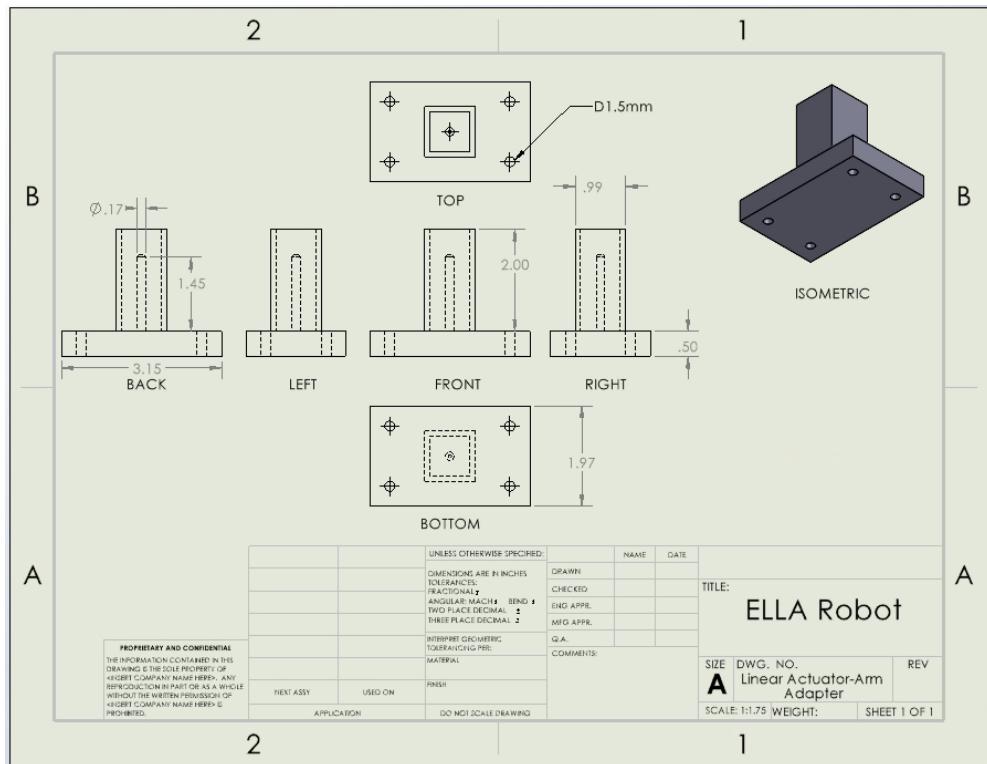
Technical Drawings for Linear Actuator-Arm Adapter
